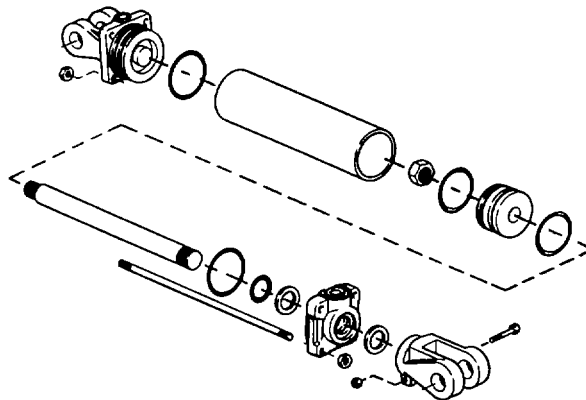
Platform Cylinder Assembly (Sheet 1 of 2) .
